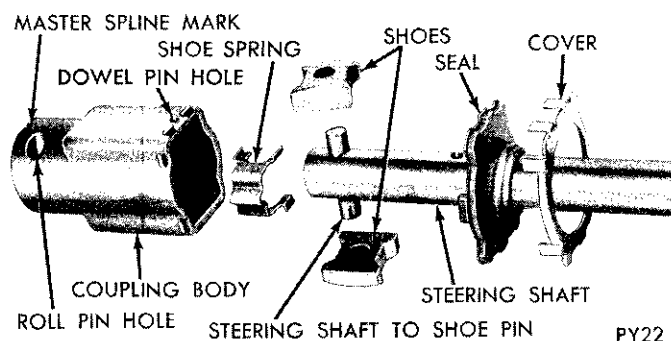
Steering Shaft "Pot" Coupling Disassembled
